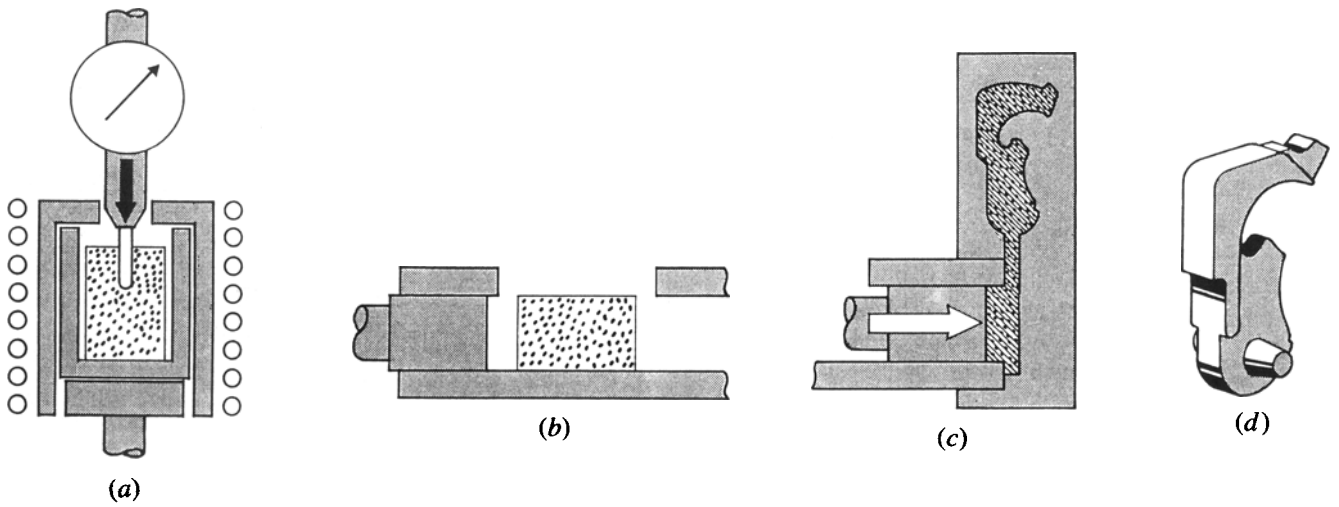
(a) Heating to semisolid state, (b) semisolid charge in casting machine, (c) die casting, and (d) finished part. SSM forming by thixocasting.
